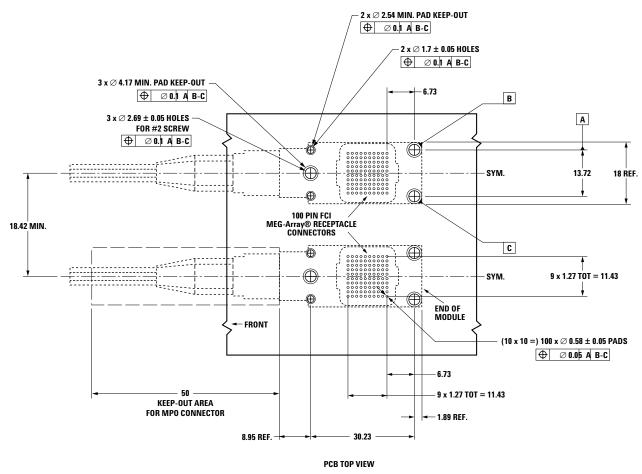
B - HFBR-7924EH Package Dimensions (dimensions in mm)
